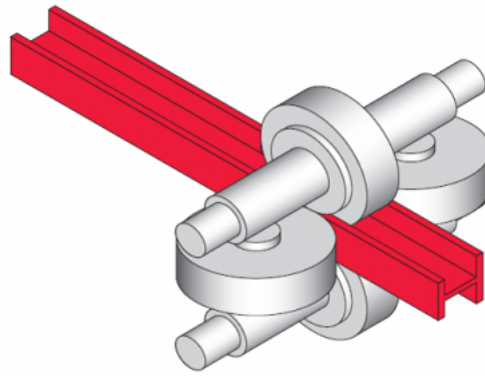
Rolling I-sections in steel mill (Steelconstruction.info, 2016a)
